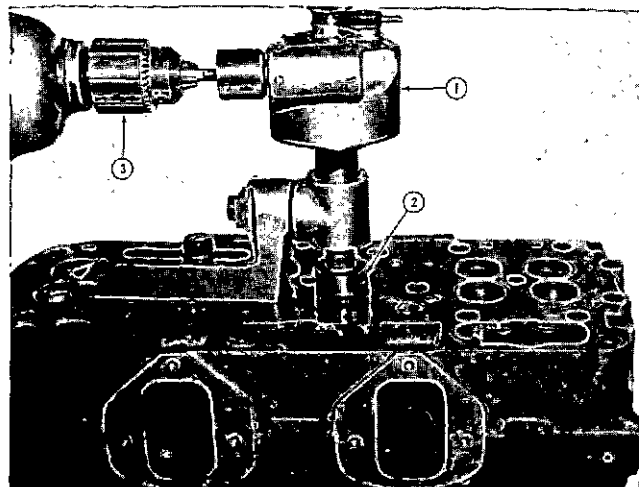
, V40232. Counterbore for valve seat insert
